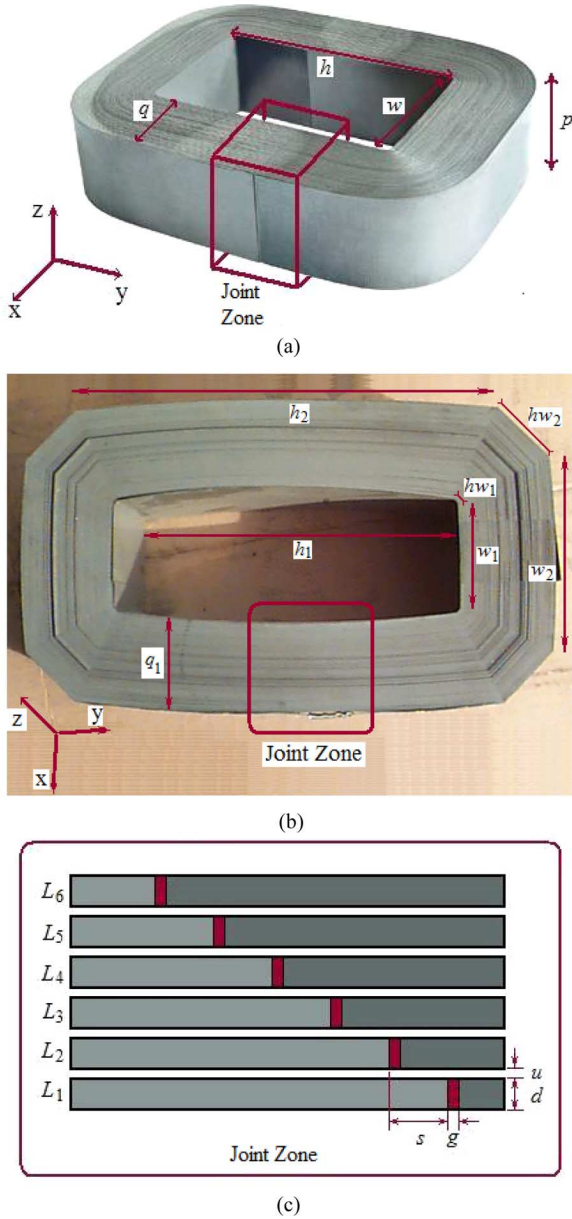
(a) CWC geometry with its design parameters. (b) OWC geometry with its design parameters. (c) Joint zone in both cores.
